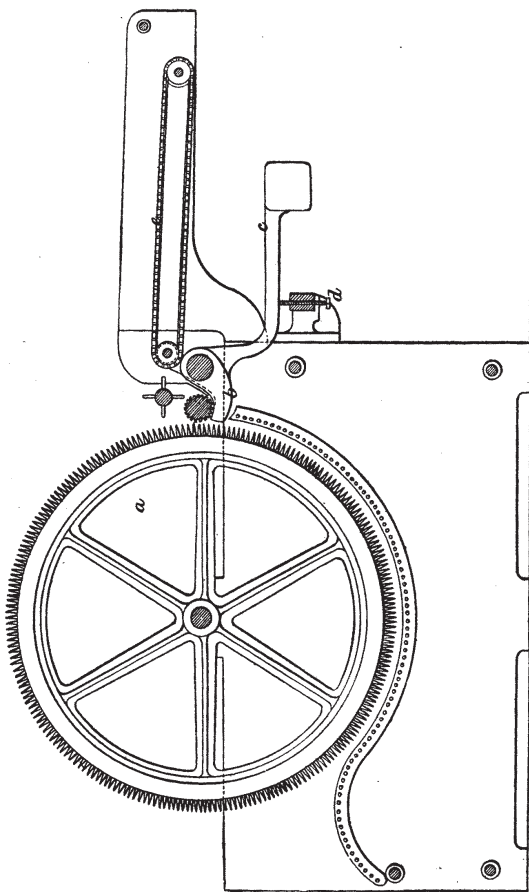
WOOL OPENING MACHINE, CONSTRUCTED BY MESSRS. SCHIMMEL AND CO., ENGINEERS, CHEMNITZ.
